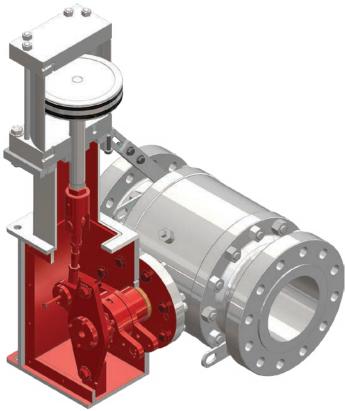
Cutaway view of RPDA Actuator and Cylinder
